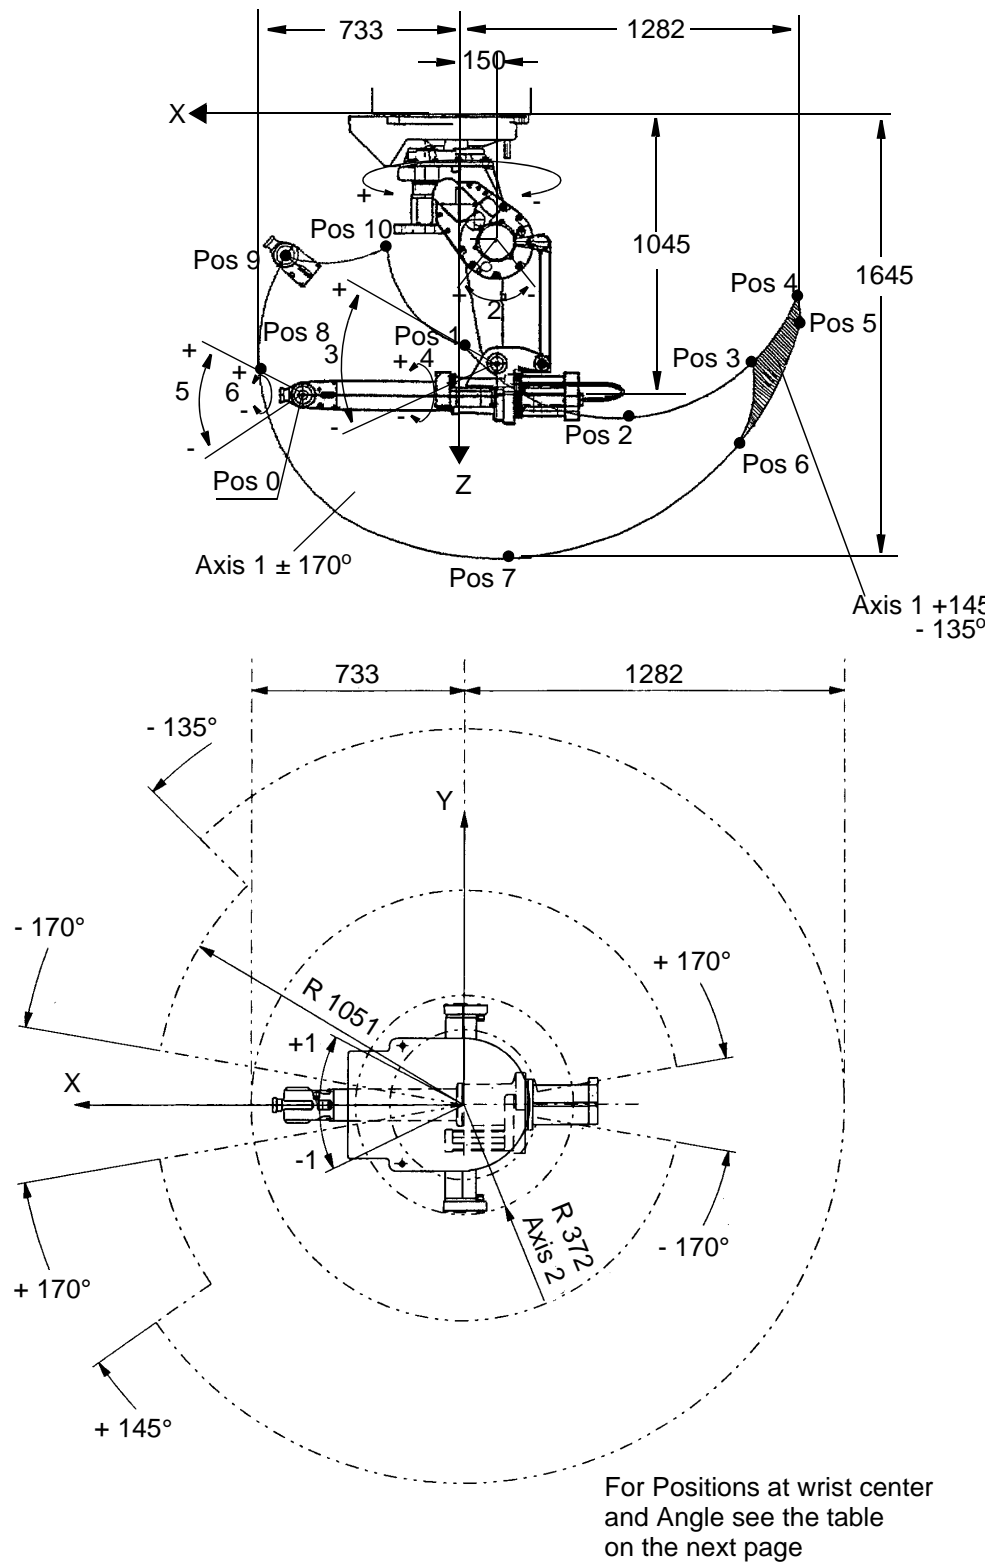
The extreme positions of the robot arm, inverted version (dimensions in mm). Manipulator seen from the side and above.
